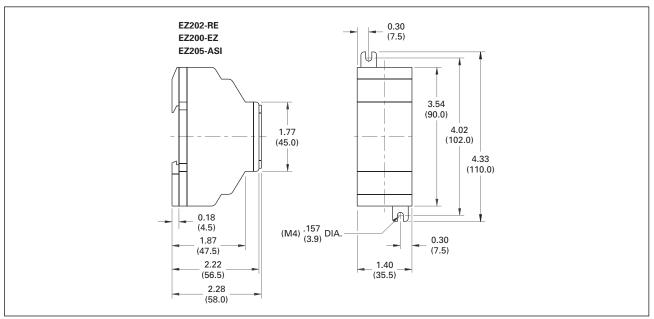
EZ202-RE/EZ200-EZ/EZ205-ASI Series Dimensions in Inches (mm), Drawing Number MD05013012E
